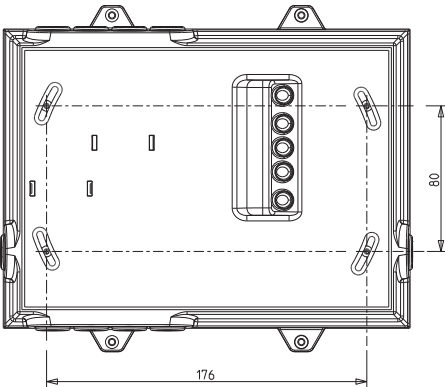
Back View of Deep Back Cover - Fixing Screw Positions
